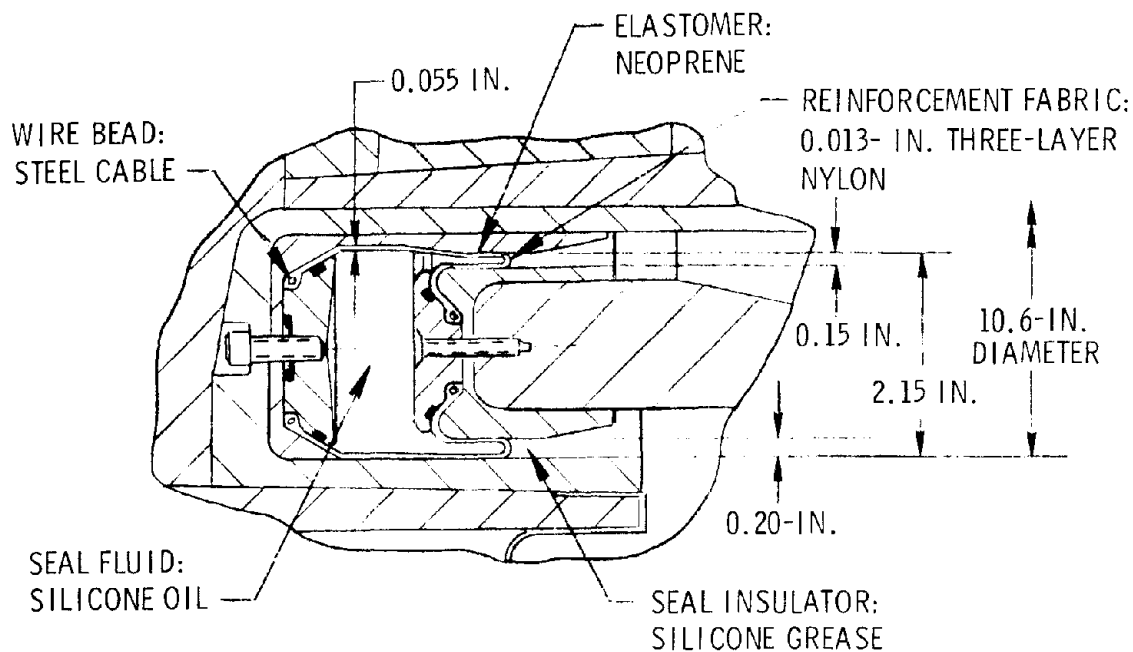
Material and Dimensional Relationships for TECHROLL Miniseal
